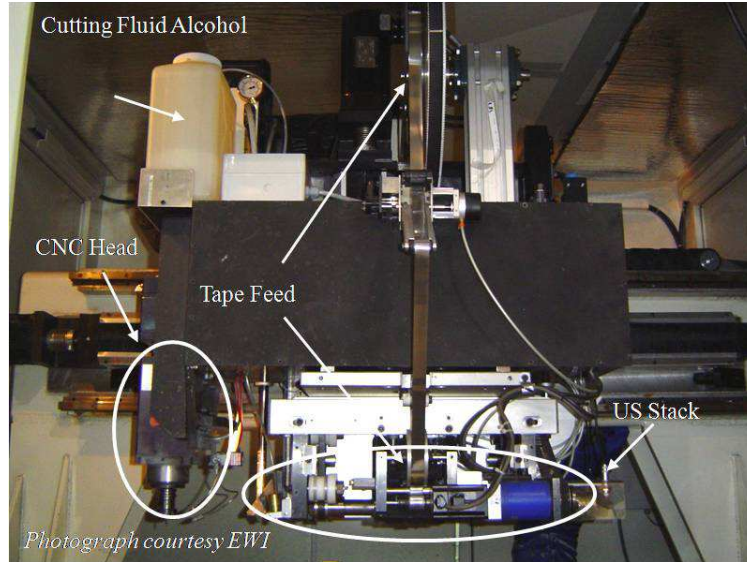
Photograph of ultrasonic transducer, booster and horn system, tape feed mechanism and integrated CNC mill.
